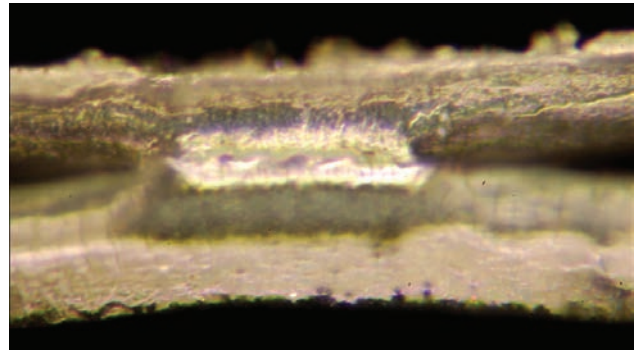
Optimum shape of the weld of polyethylene film 0.1 and 0.15 mm thick made by transmission laser welding ($\times 200$)
